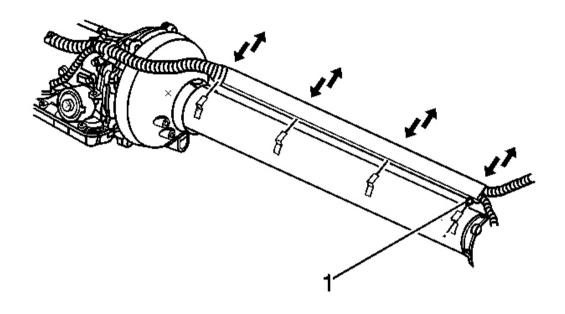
LH Axle Shaft Courtesy of GENERAL MOTORS CORP.
